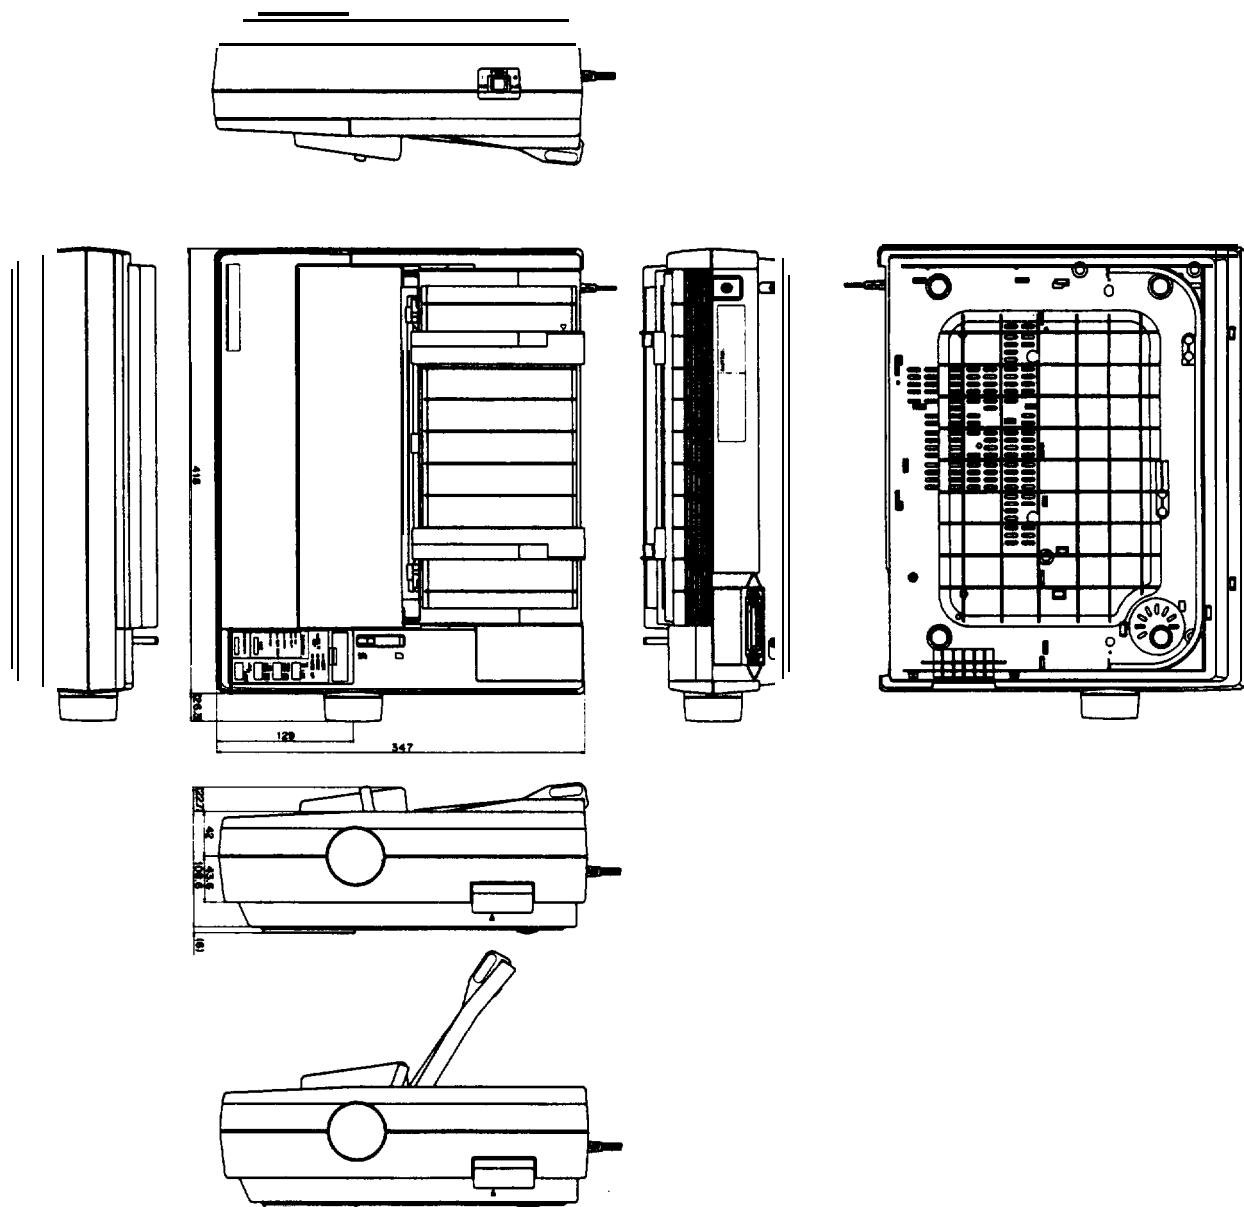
LQ-510 Printer Cover A Case Outline Drawing
